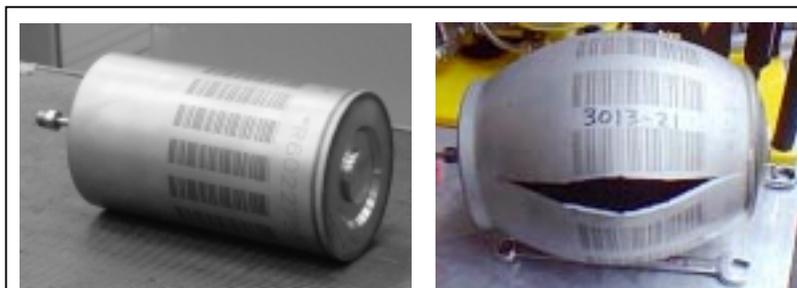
Prepared Container (left), Tested Container (failure completely outside of closure weld)
